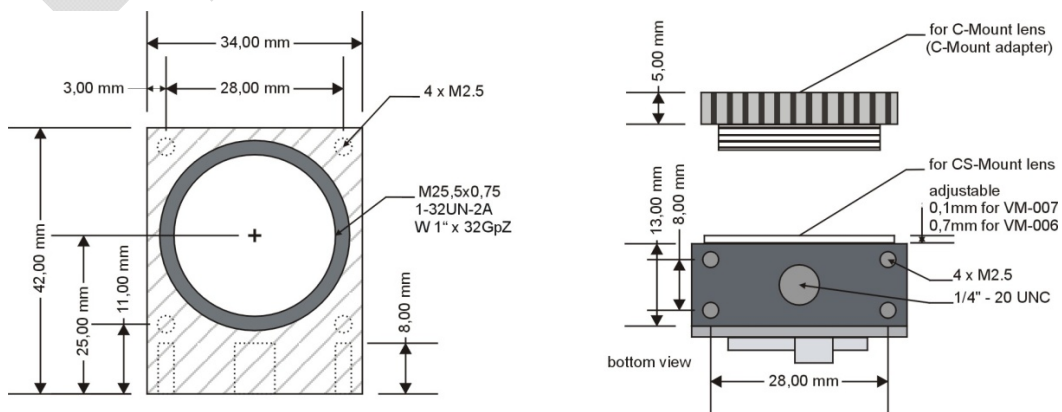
Dimensions phyCAM with C/CS-Mount Lens Holder
